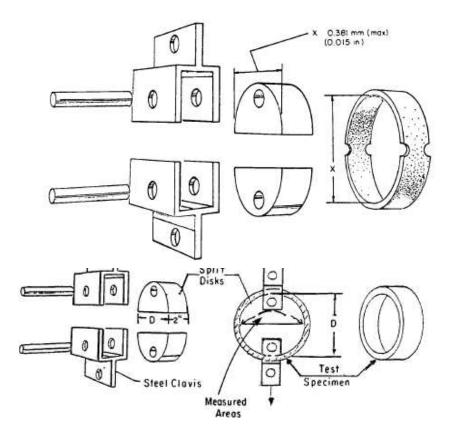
Schematic illustration of the split ring tensile specimen and the test fixture (Taken from ASTM D2290 Specification)
